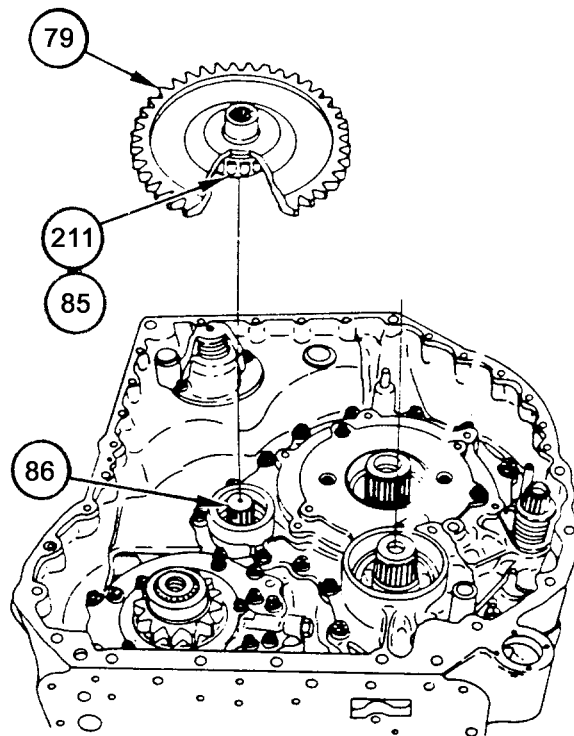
Steer Shaft Drive and Range Output Drive Gears.
